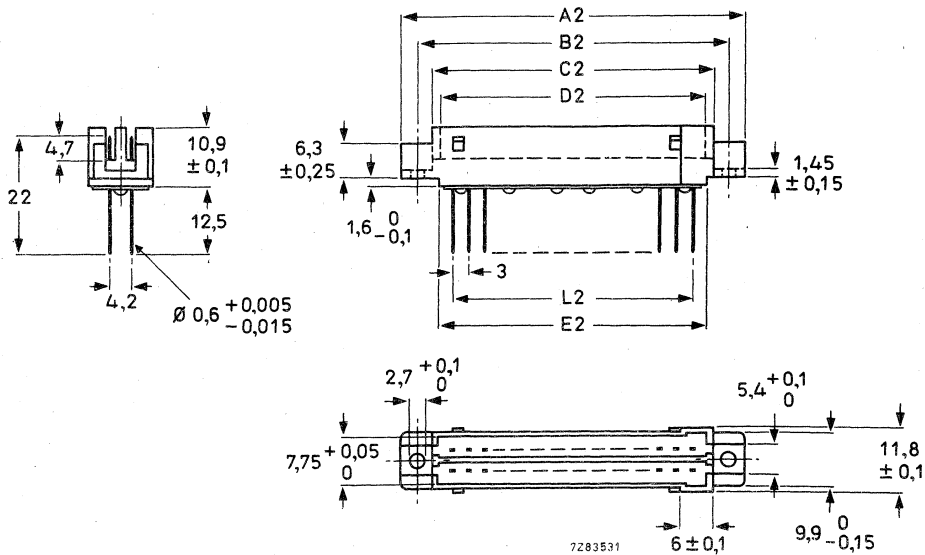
Male part with pins for wire wrapping; see Table 2 for dimensions A2, B2, C2, D2, E2 and L2.
